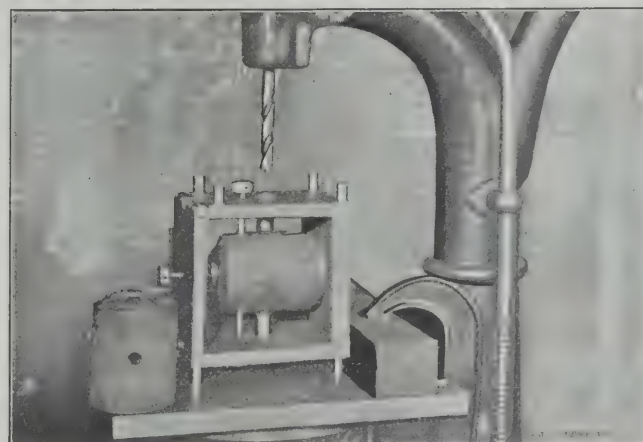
Jig for Drilling the Wrist-pin Hole in the Piston
